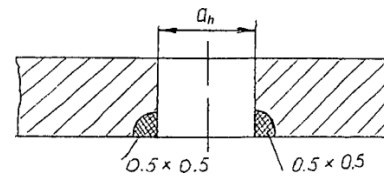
Recommended Sizes of Initial Manufacturing Defects for thick sheets
